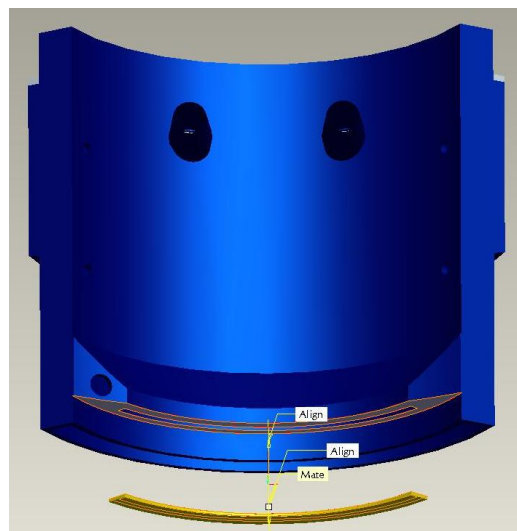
ProEngineer model of the plug used to fill the support material removal hole at the outlet of the oxygenator module.
